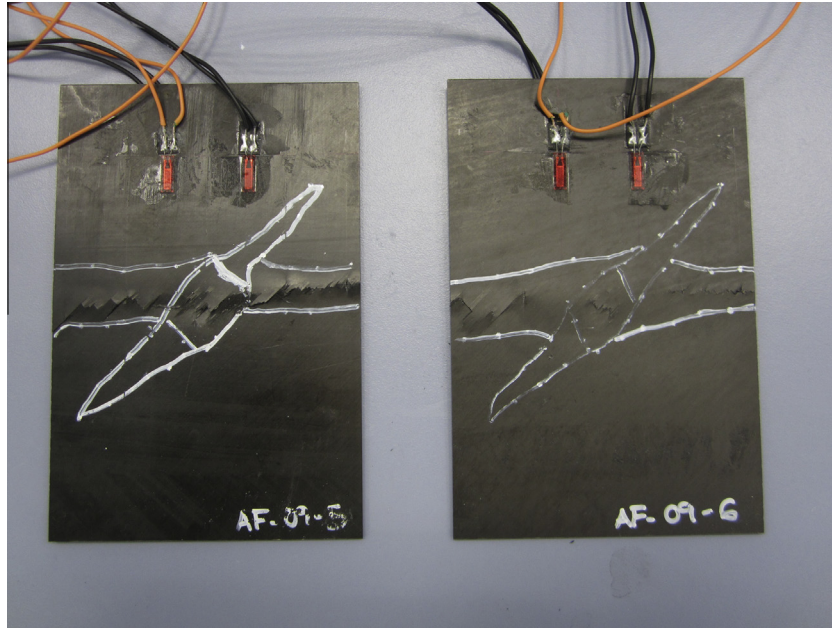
Specimens 1.472 mm thick impacted at E_{BVID} , inspected after CAI test.
